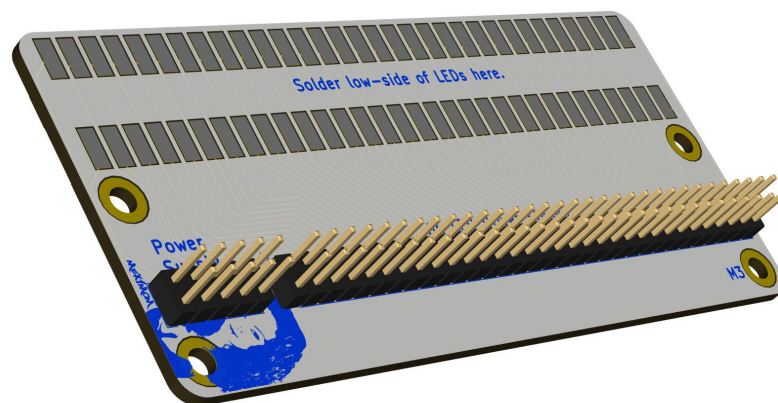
Adapter board for LED matrix enables simple plug and play after soldering high- and low-side of the LED strings.
